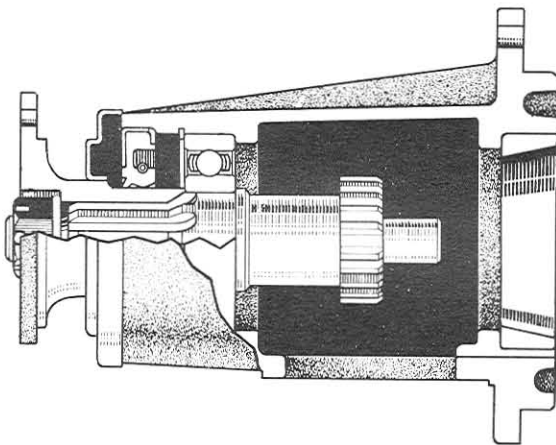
Transfer Extension G2395 Housing Assembly
